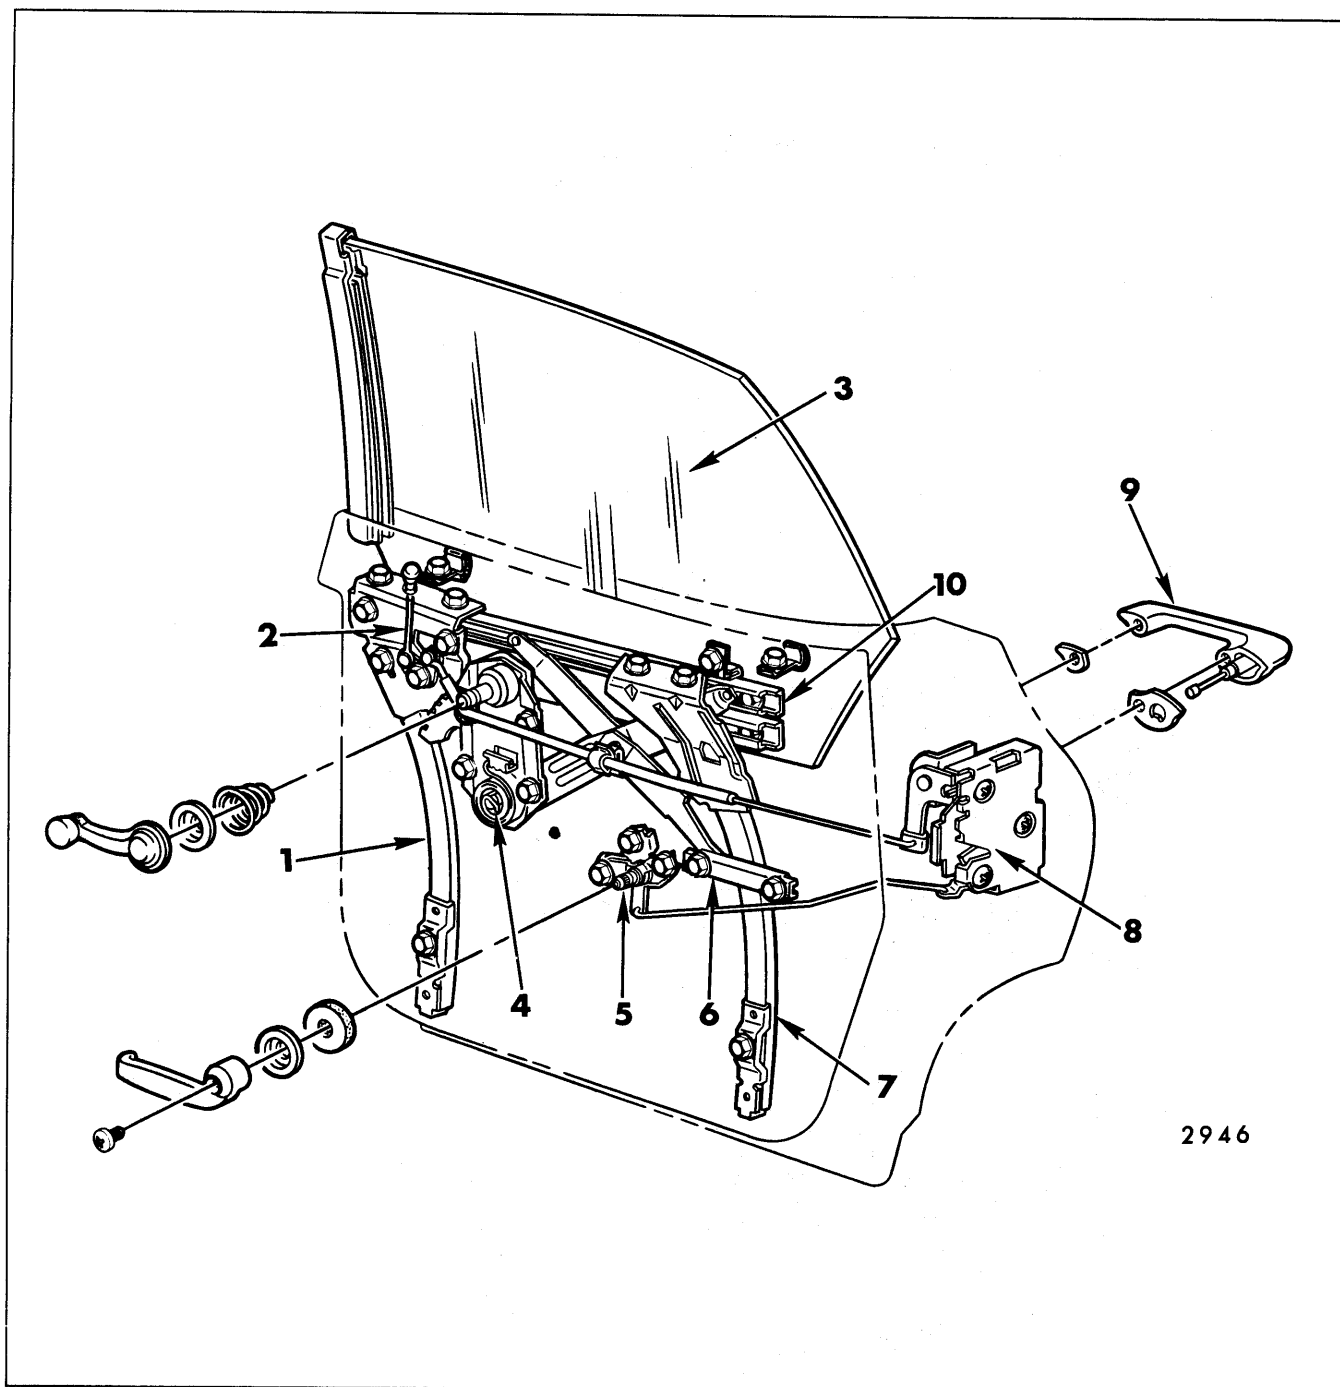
Rear Door Hardware - "A-39" Styles
